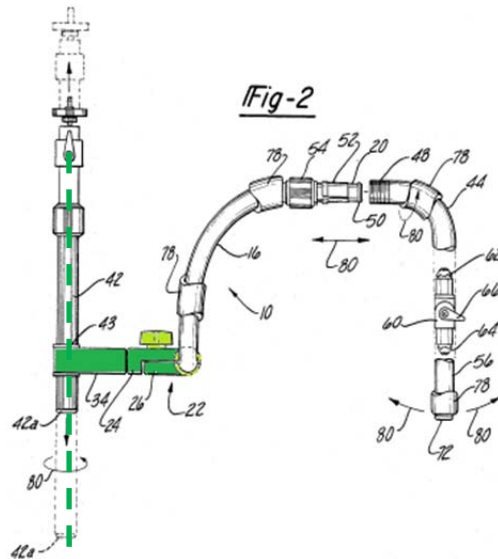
Reproduction of Figure 2 from the '309 Patent. The hinge member is highlighted in green. Relative rotational motion between the hinge member and the camera (which mounts on the end of mounting tube (42)) occurs with rotation of mounting tube (42) about a first axis of rotation (green dashed line) and is illustrated as movement (80) in the figure.
